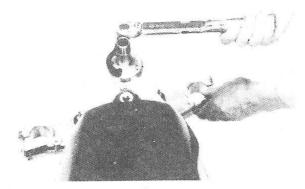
Tightening the ring nut with a torque wrench (note the special spanner wrench designed to be used with a torque wrench) (Sec 6)
